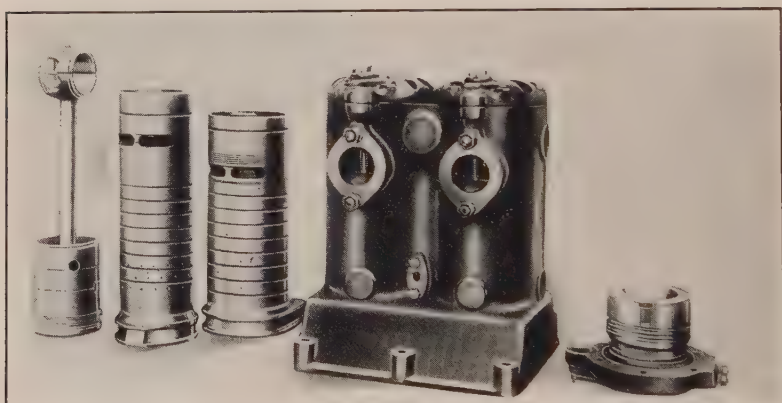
Willys-Knight engine showing valve sleeves and cylinder head.
